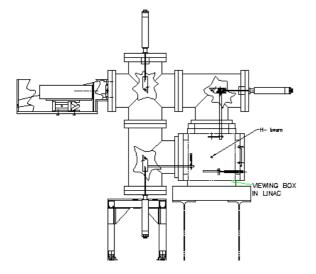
Laser scanning assembly installed on linac beamline. View is looking up beamline.
